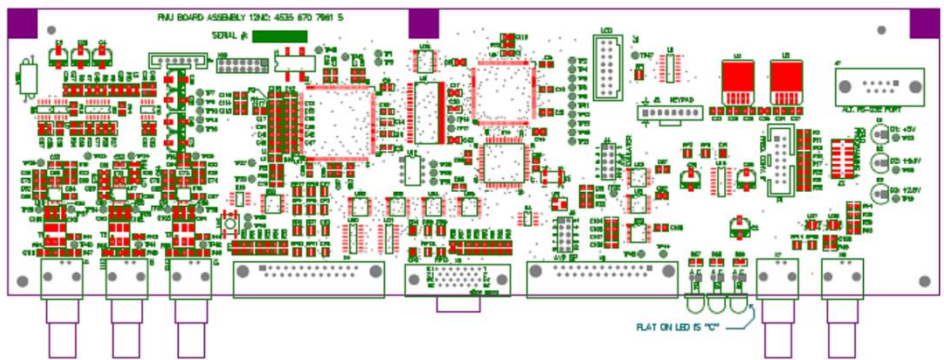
PMU PRINTED CIRCUIT BOARD ASSEMBLY CONTAINS “LEAD”.
